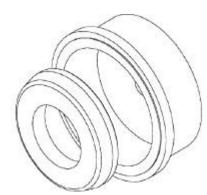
Rear Crankshaft Seal Installer 8349 Courtesy of CHRYSLER LLC
